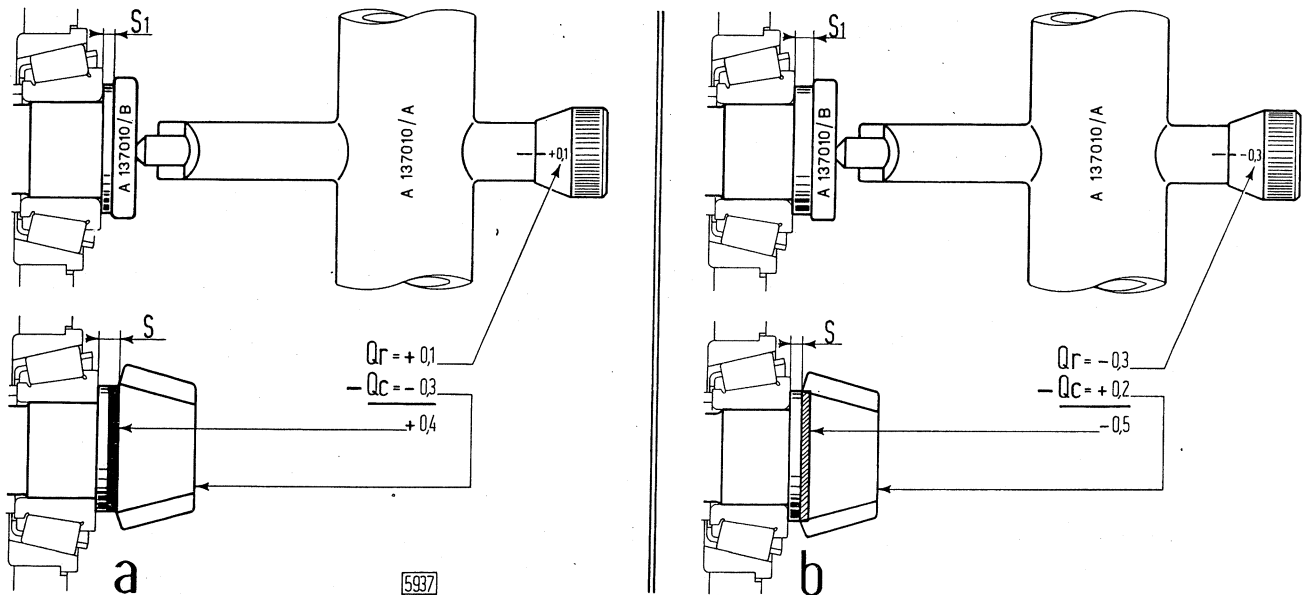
Exemplifying layouts of two pinion cone center distance settings.
